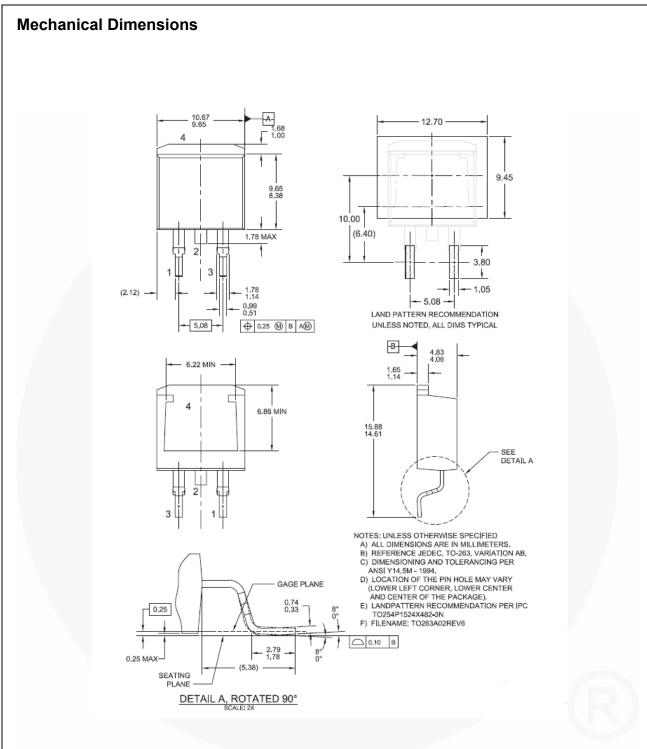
TO263 (D²PAK), Molded, 2-Lead, Surface Mount
